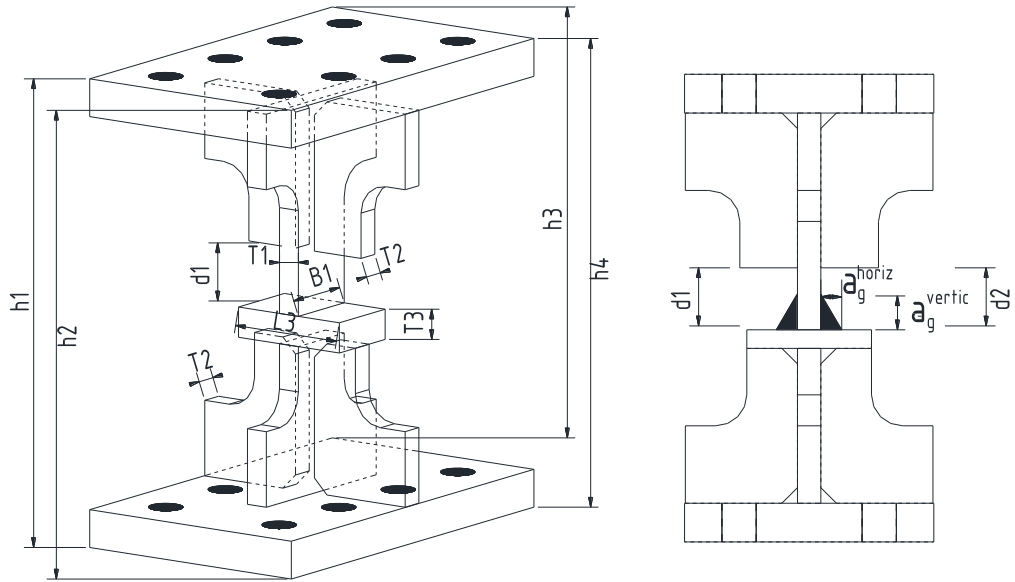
Welded specimens - nominal geometry
